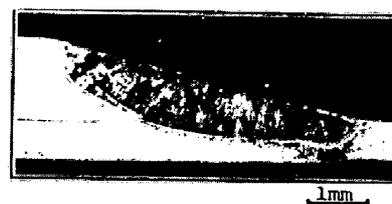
The cross section of TIG lap joint weld zone.
